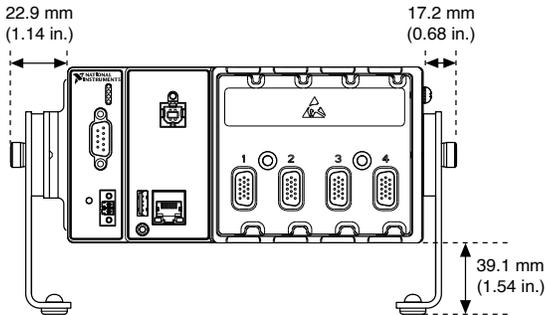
cRIO-9066/9067/9068 Desktop Mounting Front Dimensions, Typical
